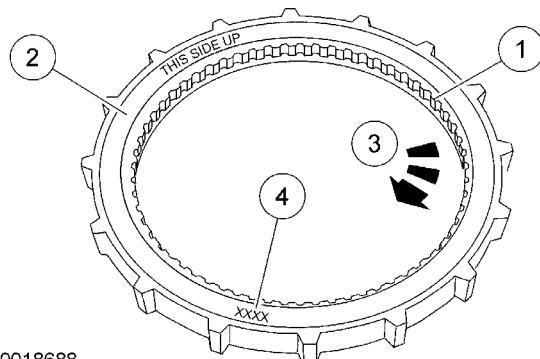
Low/Reverse Mechanical Diode — One-Way Clutch
